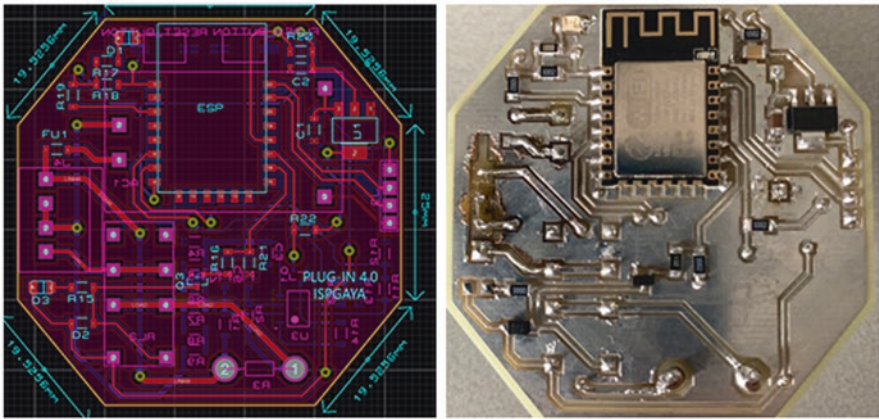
Plug-in sensor module; view on the left side the PCB project and on the right side the final developed PCB
